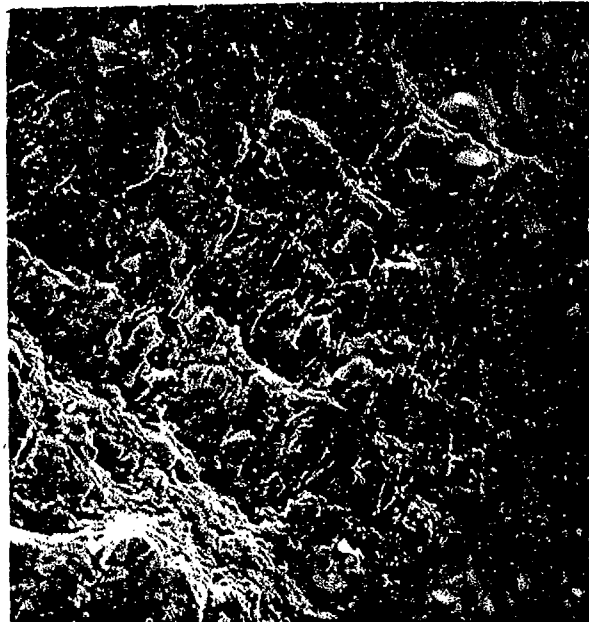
Fatigue striations on fracture surface of temper-embrittled AX-110 weldment containing LOP, 1400x.
